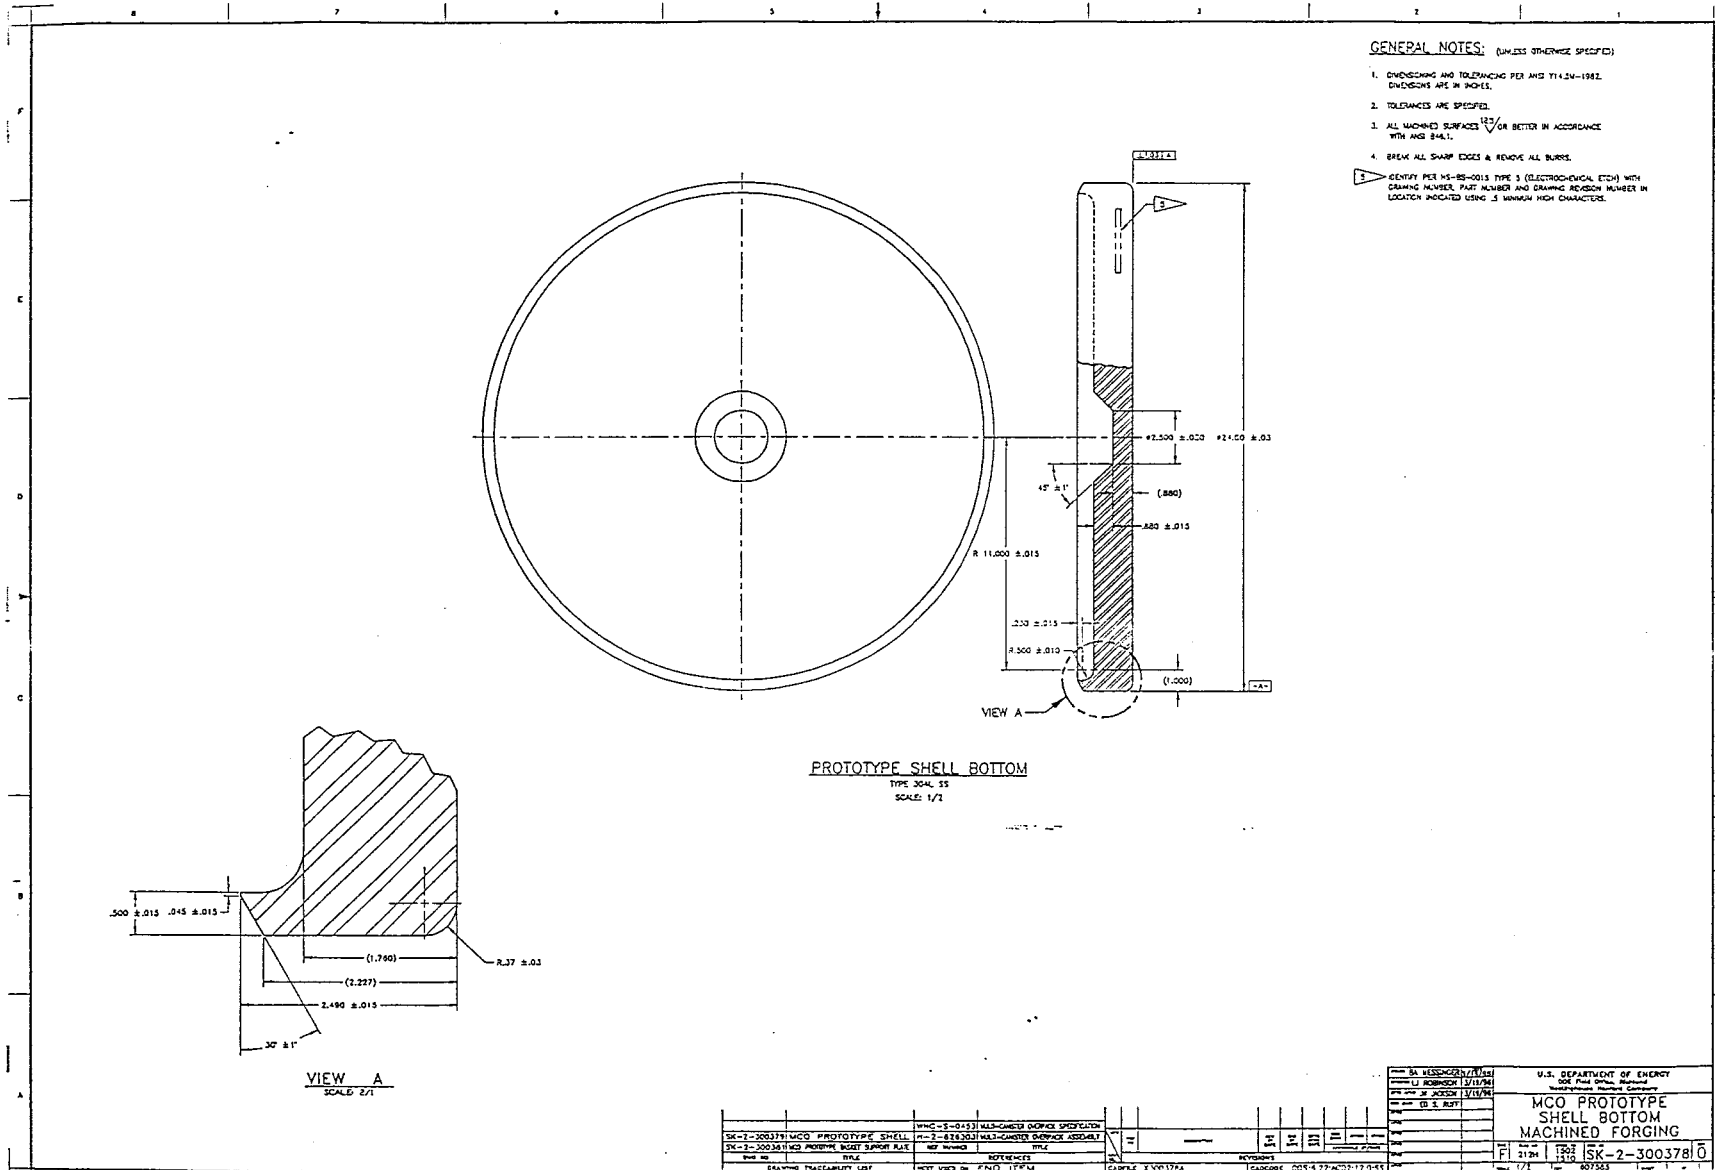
Multicanister Overpack Prototype Shell Bottom Machined Forging.
